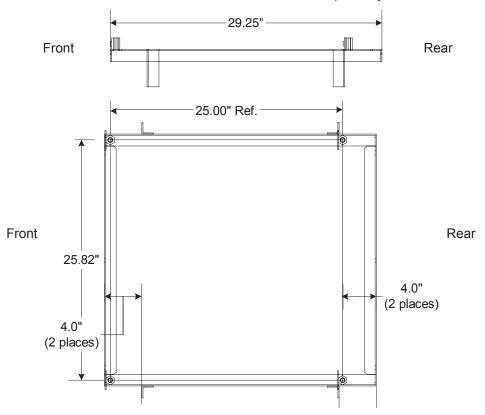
, Pad Frame Template for Single MiniBay Cabinet
